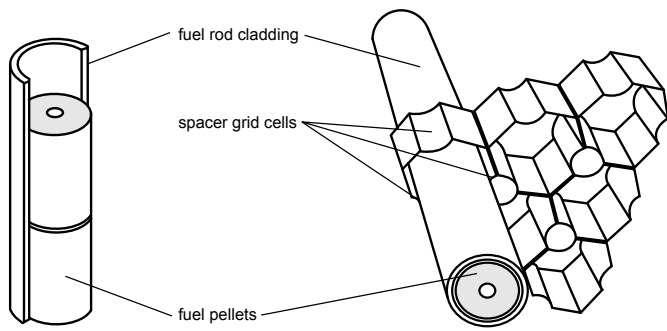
A part of the fuel rod filled with the fuel pellets (left) and a fuel rod fixed into spacer grids of the hexagonal-type fuel assembly (right).
